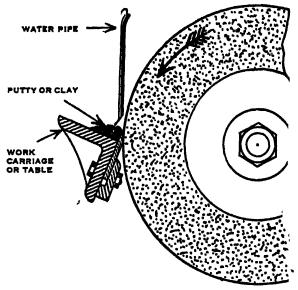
THE WHEEL ROTATES AGAINST THE CUTTING EDGE OF THE KNIFE
